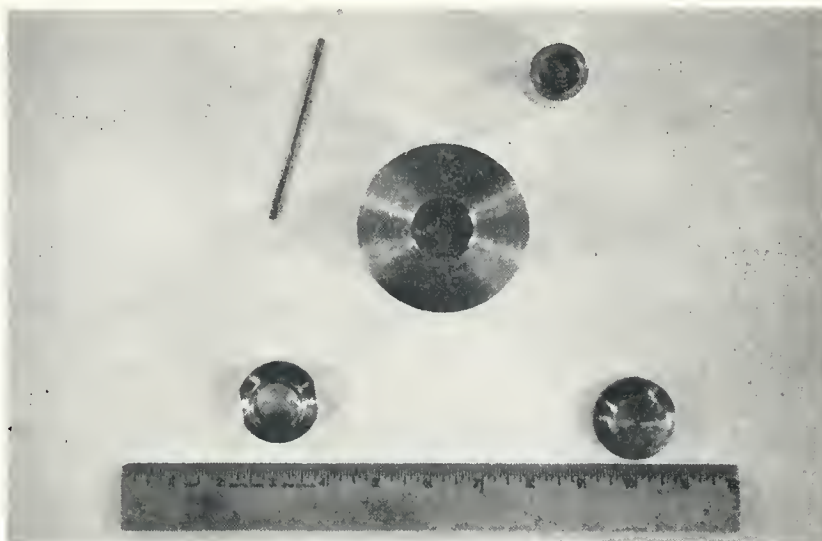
HOLDER ASSEMBLY COMPONENTS
